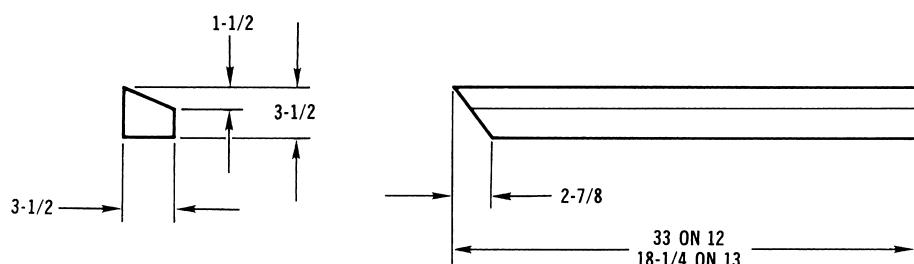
Horizontal Stabilizer Single Shipping Container (Sheet 4)
